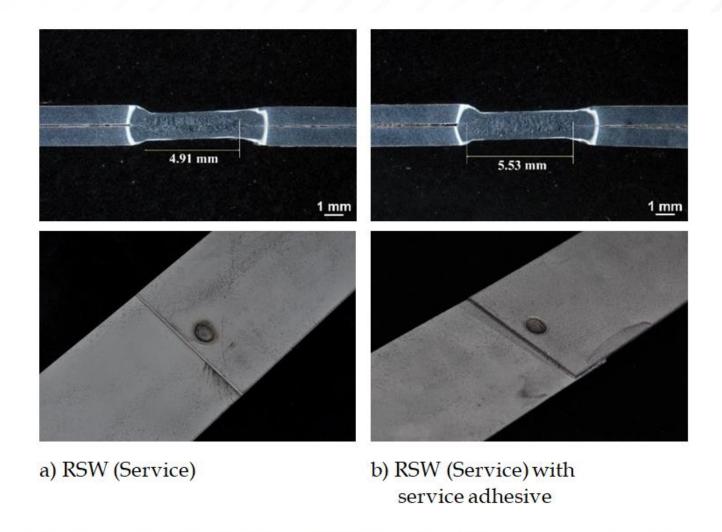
(a-b). 1.0 mm MS1500 EG RSW (Service) typical joint and cross-section photos
